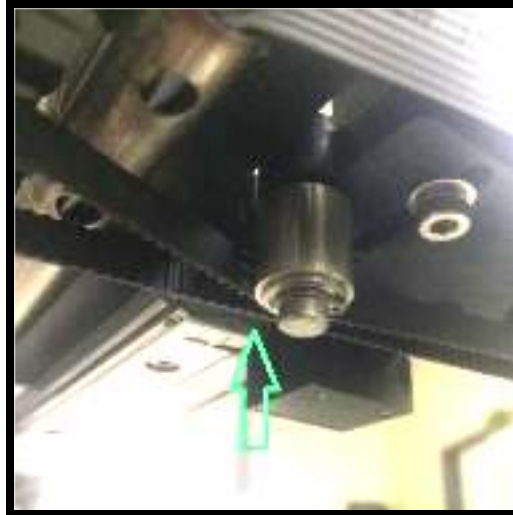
Note: Ensure the guide roller spins freely. If not, a replacement is required.
